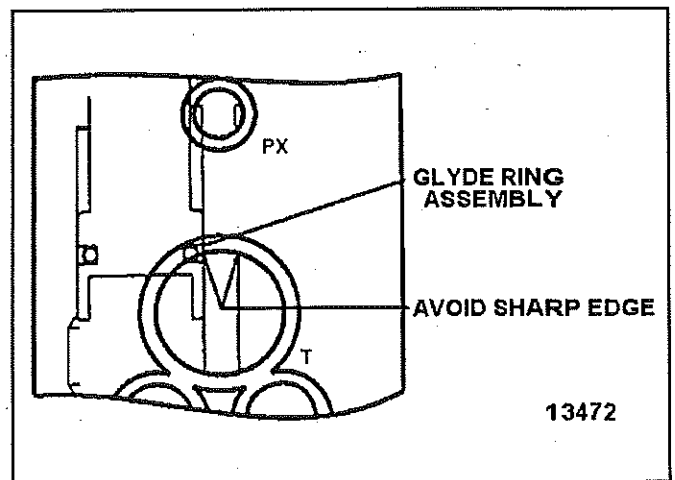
VIEW THROUGH TANK PORT (13472)
